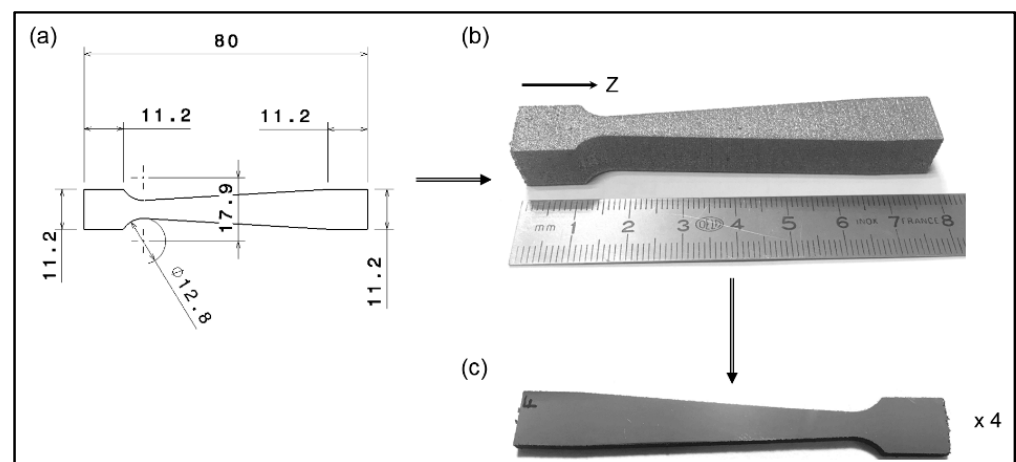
L-PBF trapezoidal sample used to analyzing recrystallization thresholds: (a) sample dimensions; (b) 11.2-mm-thick as-built specimens; (c) 2-mm-thick specimen obtained after cutting and mechanical polishing.
